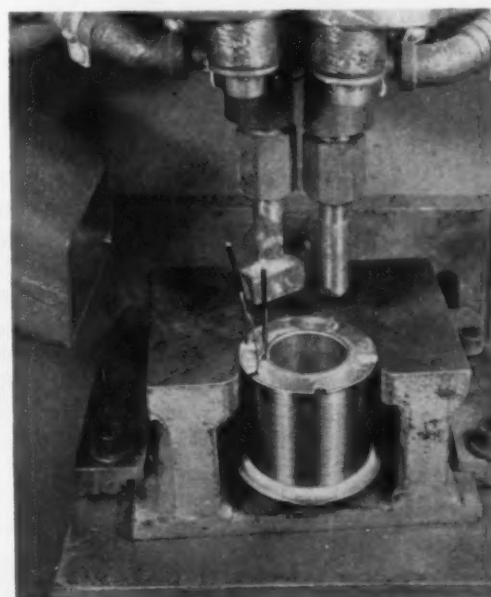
Two split sleeves are centered over this welder's horn, pressed together and then projection welded at four points to the channel-shaped bracket.
